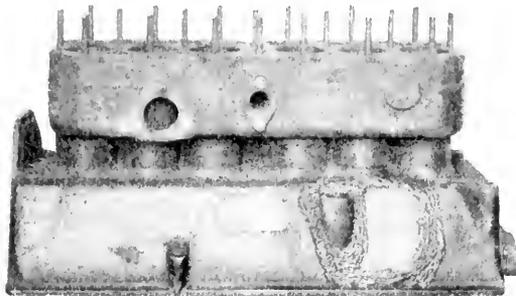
Cylinder Block Shown Above After Being Welded
